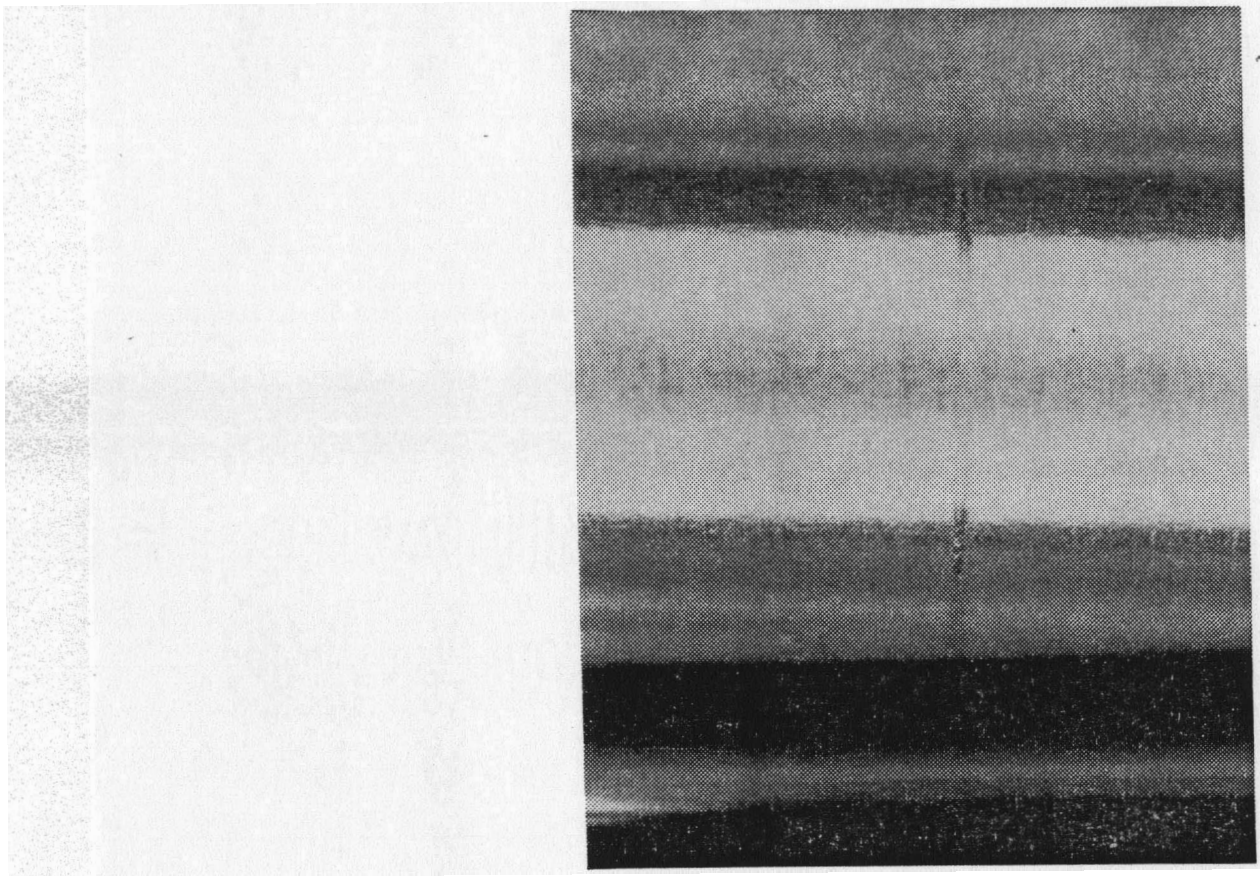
Show Machine Scratch on a Type 316 Stainless Steel Tensile Sample. 36X.
